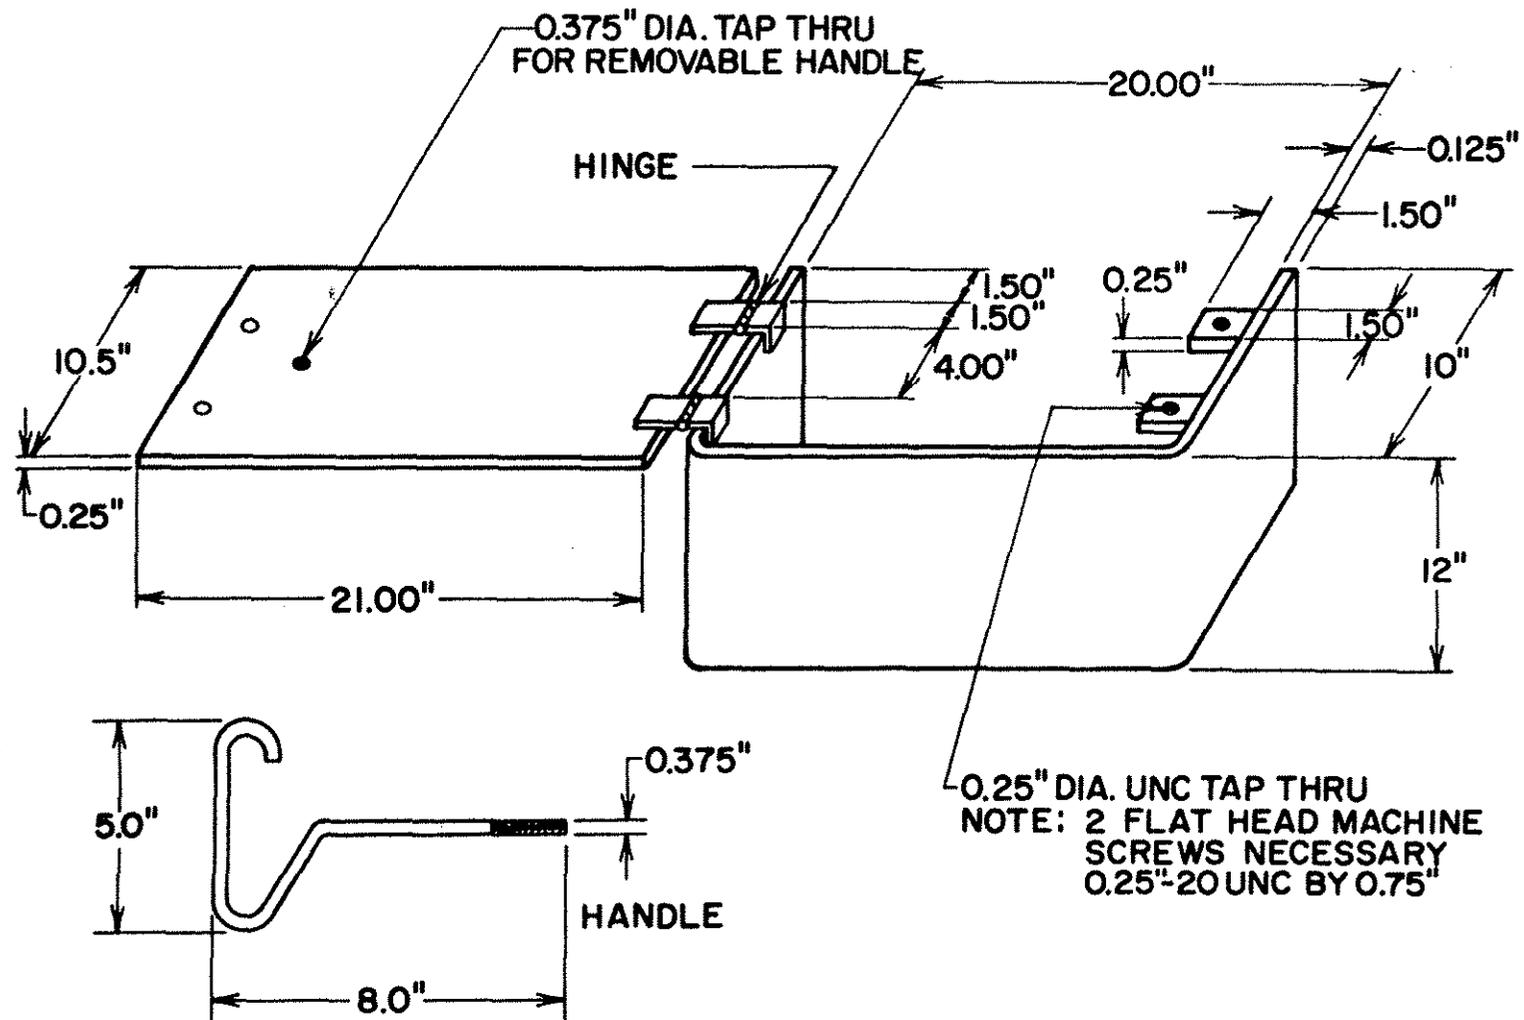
Schematics and dimensions of the crack monitor gauge access box.
